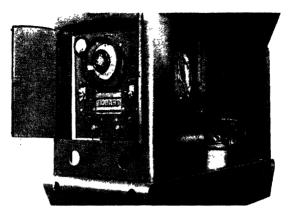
A gasoline engine driven D.C. welder and A.C. power source combination. This apparatus, in addition to being a welder, can furnish emergency power for construction work, etc.
